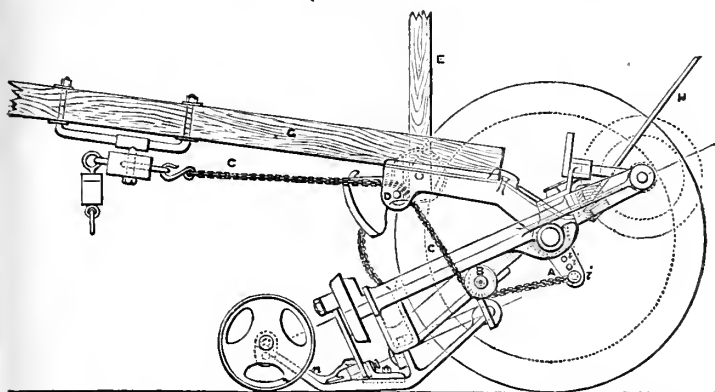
SECTION SHOWING THE ARRANGEMENT OF THE DRAUGHT-CHAIN.
